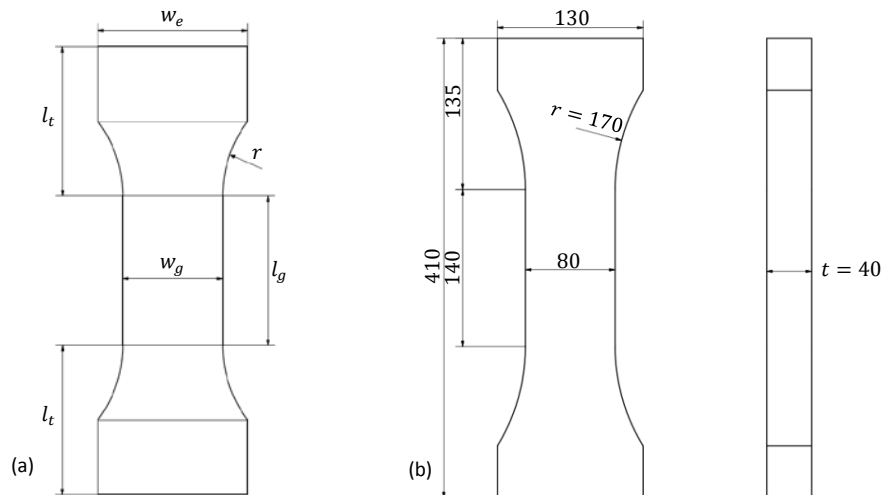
(a) UTT specimen geometry parameters; (b) Final specimen geometry (Dimensions in mm)
